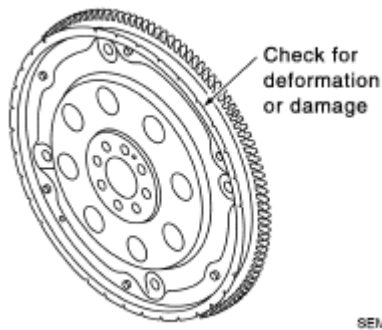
Identifying Drive Plate And Signal Plate For Deformation Or Cracks
